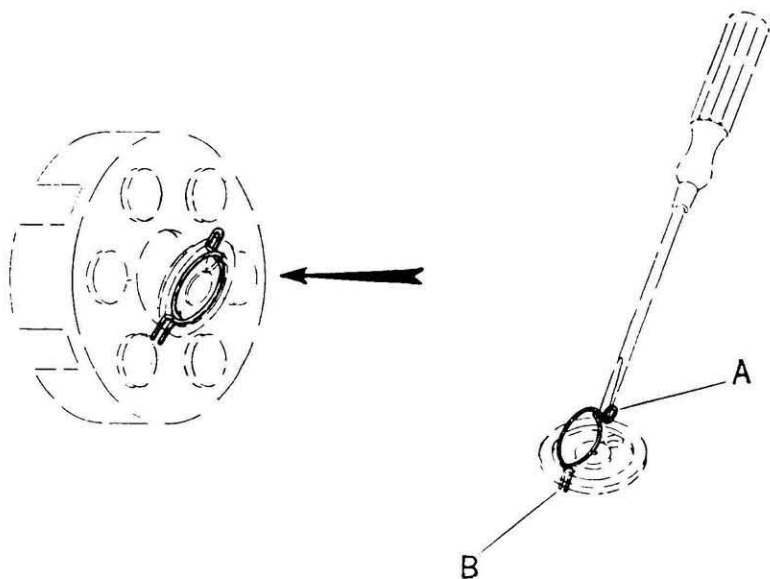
Re-assembly of the Clutch Thrust Plate.
